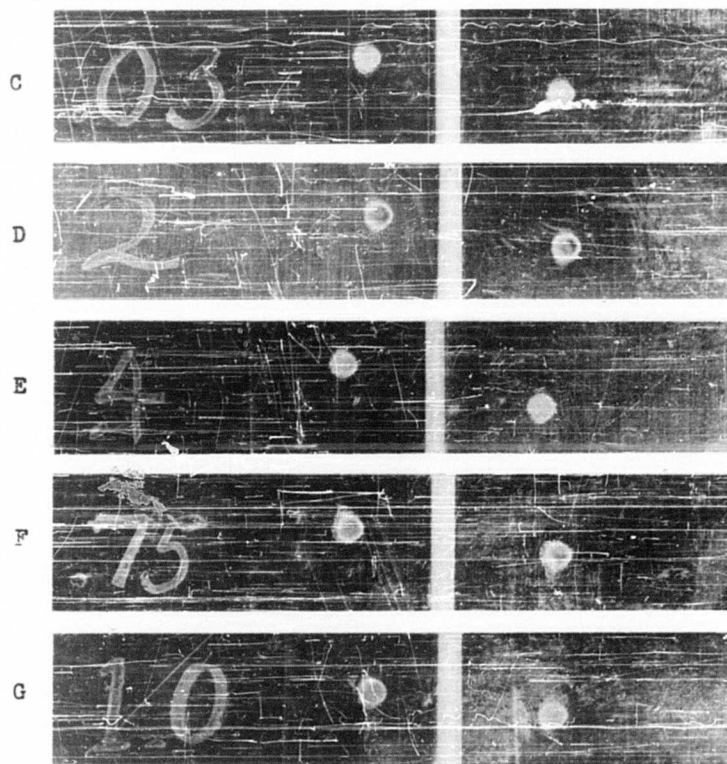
SAMPLE WELDS BETWEEN STRIPS OF 2014-T6 ALUMINUM ALLOY
